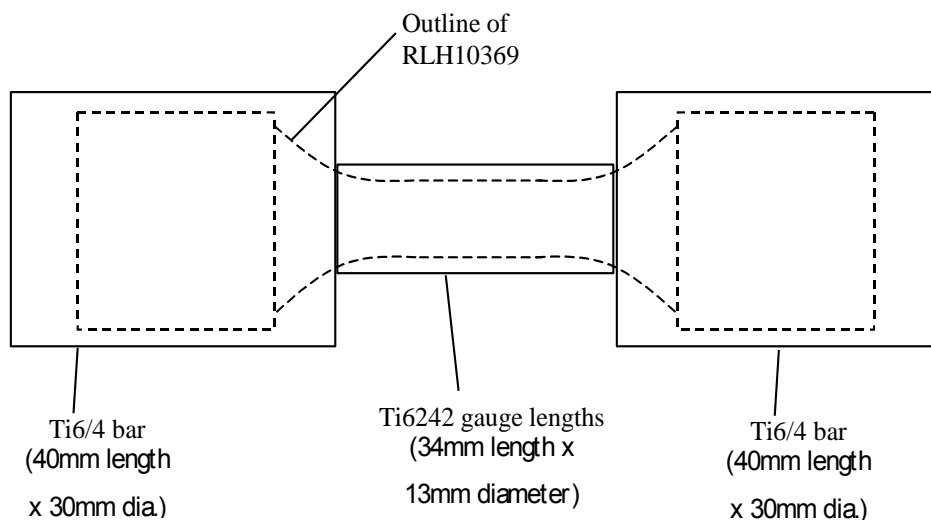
Friction welded test-piece schematic diagram
